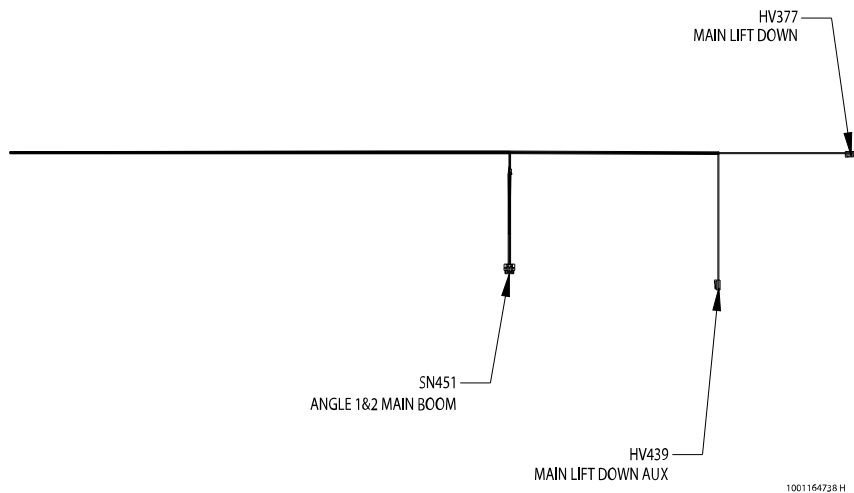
Tower Upright Valve Harness - Sheet 3 of 4
